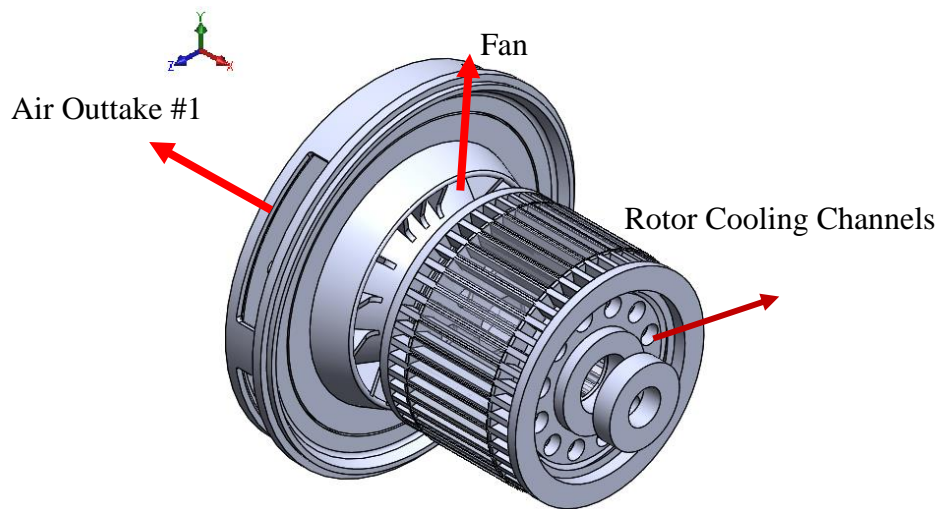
Motor, Fan, and Exhaust Outtakes' Geometry on Reference Test Motor
